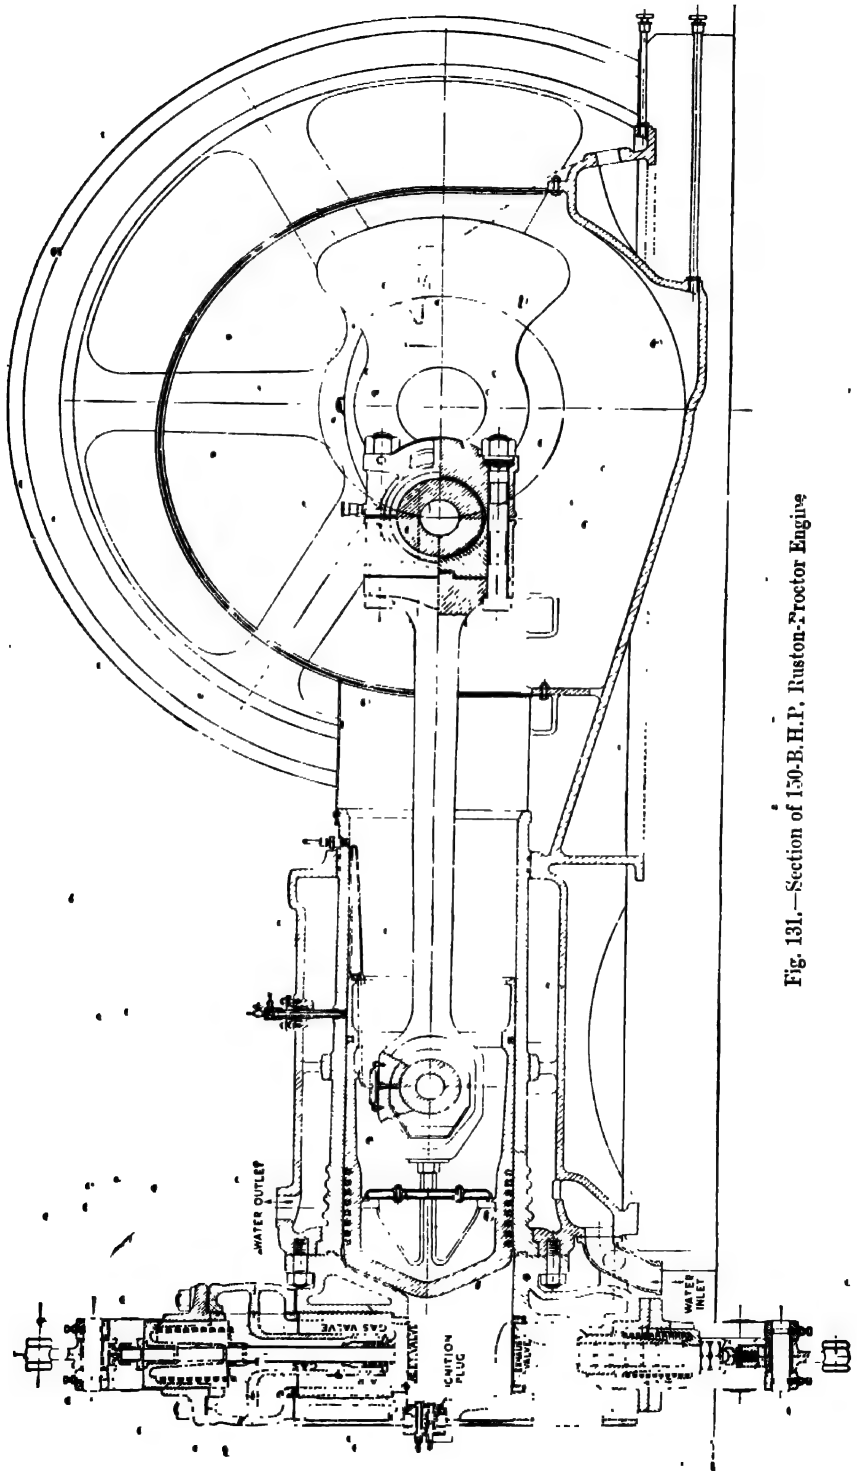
Section of 130-B.H.P. Ruston-Proctor Engine
